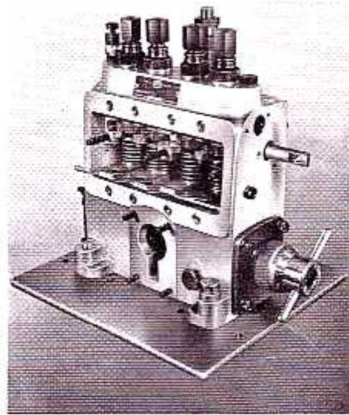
CHECKING CAMSHAFT END FLOAT USING GAUGE 7044/934
